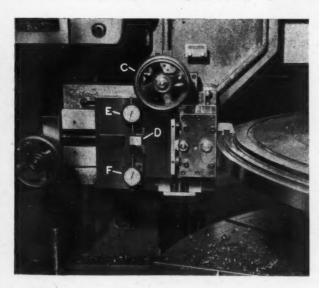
Close-up view of the special tool-slide which has been provided on the Richards machine shown in Fig. 5
